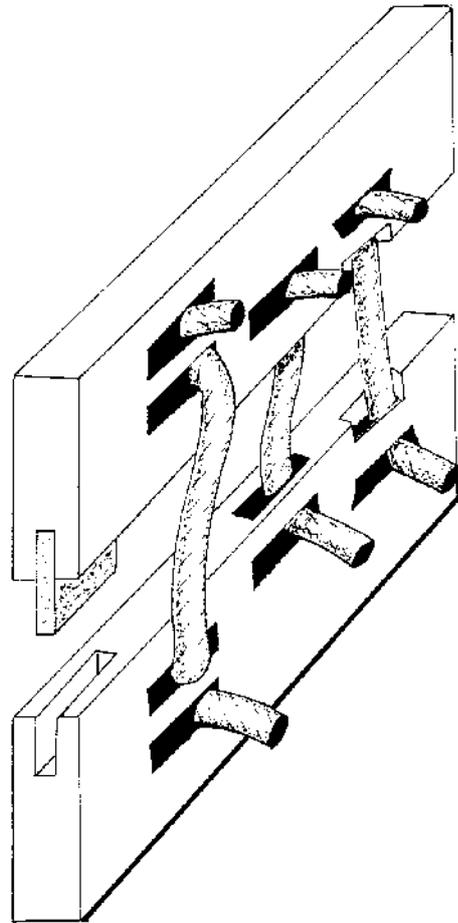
Exploded view of planks with unpegged mortise-and-tenon joint and three different types of lashing: left to right, lashing through V-shaped holes (entrance and exit in same surface); through L-shaped holes (entrance and exit in perpendicular surfaces); and reconstructed Dahshur-boat ligatures.
